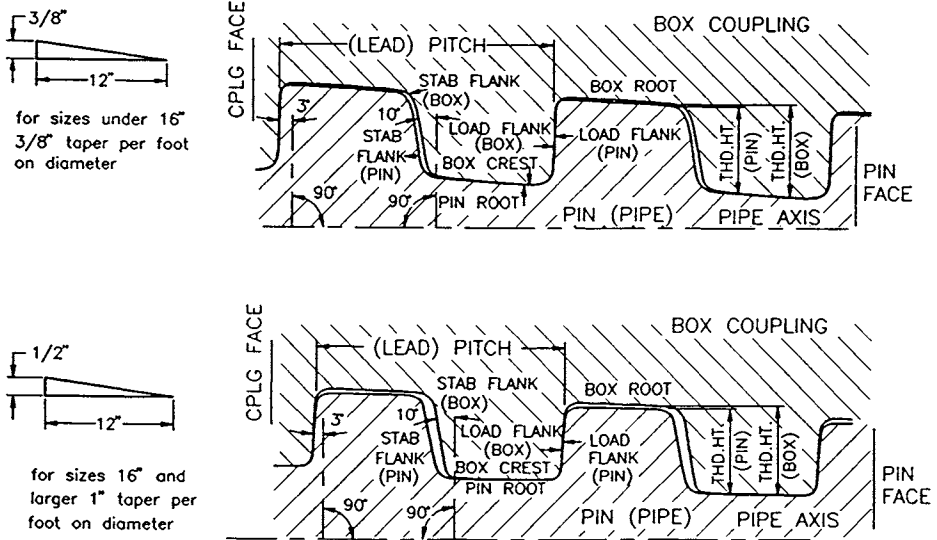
(a) API Buttress thread configuration for 13 3/8 in. outside diameter and smaller casing; (b) API Buttress thread configuration for 16 in. outside diameter and larger casing. (After API RP 5B1, 1988.)
